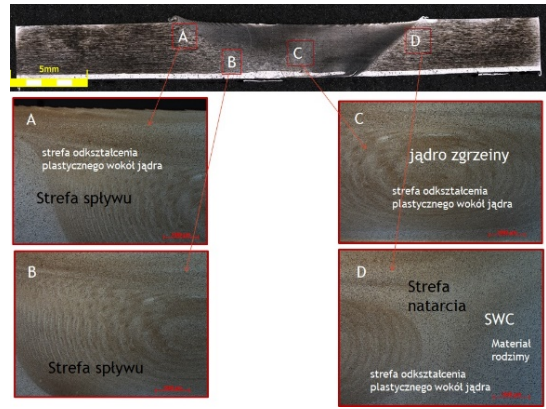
Weld microstructure confronted with advancing side, weld nugget and retreating side
